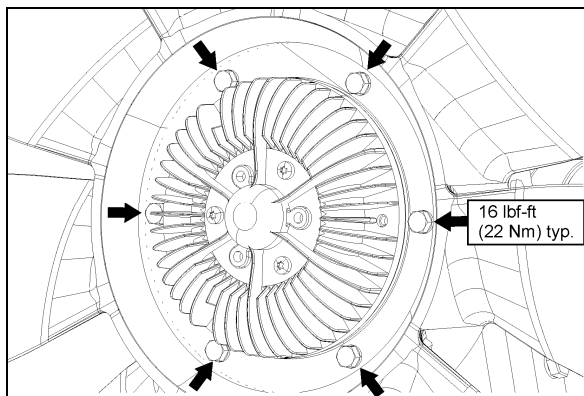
RADIATOR FAN MOUNTING BOLTS 05125
